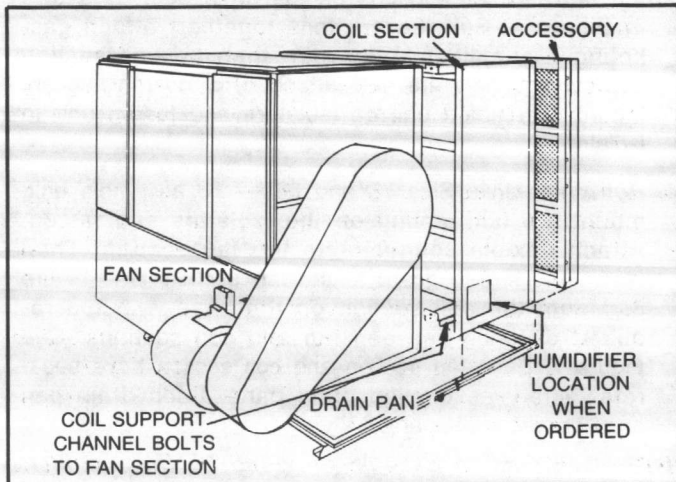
Exploded View of the Horizontal Draw-Thru Unit Size 63
